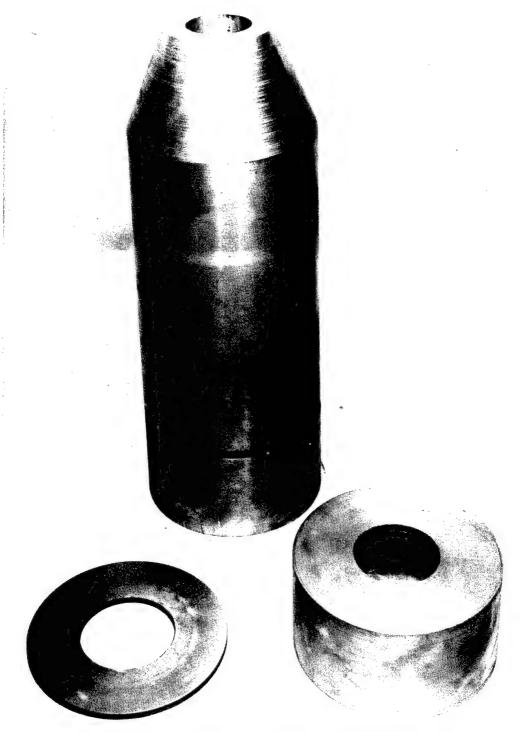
EXTRUSION PREFORM-PUSHER BLOCK ASSEMBLY
